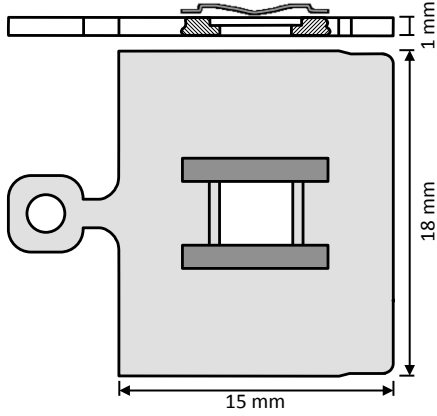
SPECS sample holder design with pocket and through-hole, and spot-welded clips for sample mounting.
